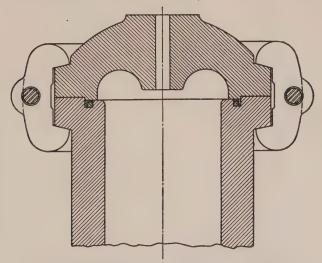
Application of T-Head Bolts for Fastening Head to Cylinder.
